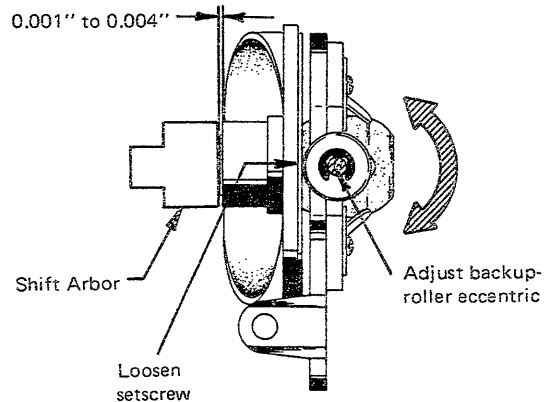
Shift-Cam Backup Roller (Rear View)
